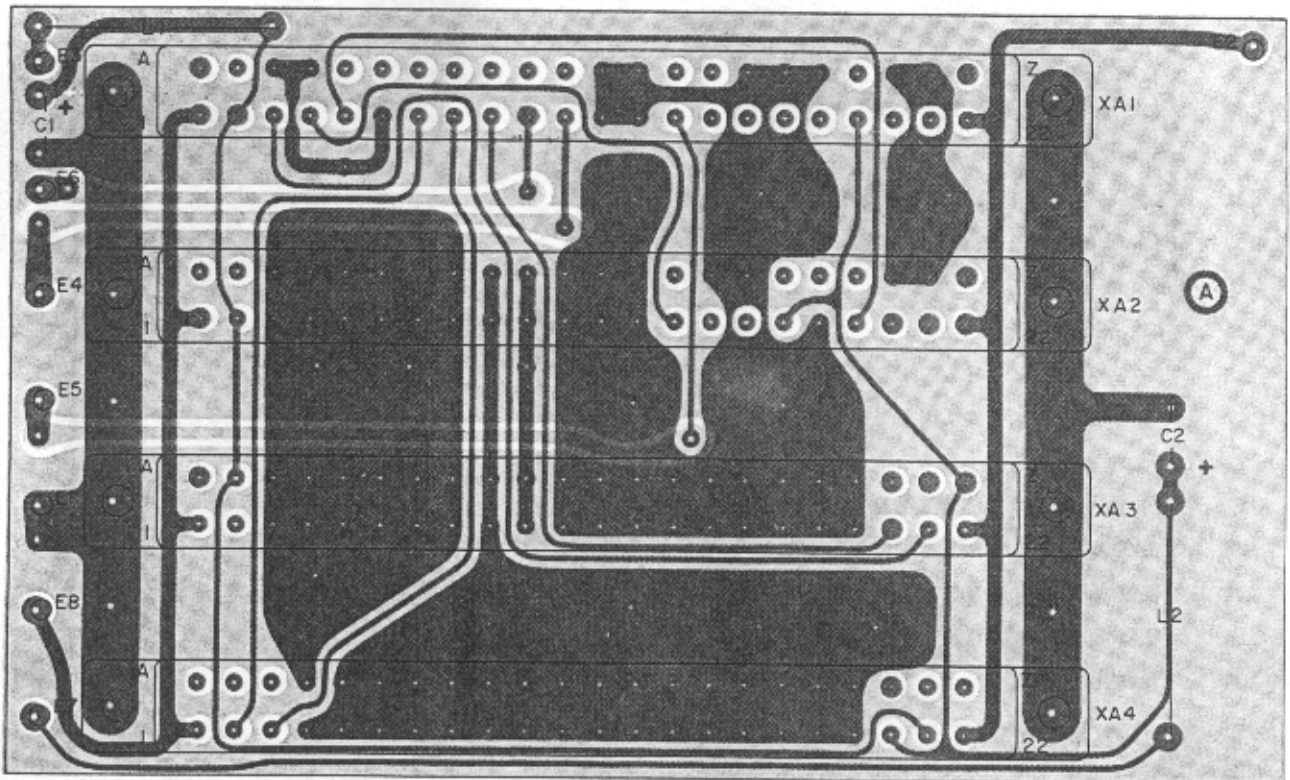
Part 23490 Filter Mother Board (A1A1), Location of Components
